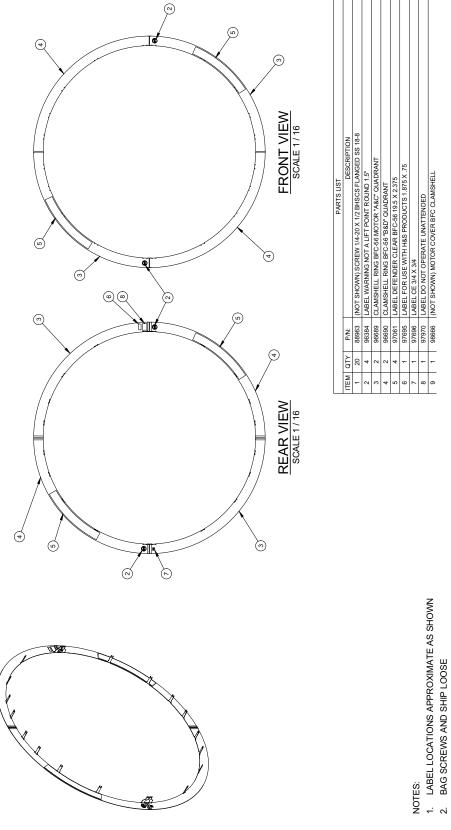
BCF-56 DEFENDER GUARD KIT ASSEMBLY (P/N 97221)
